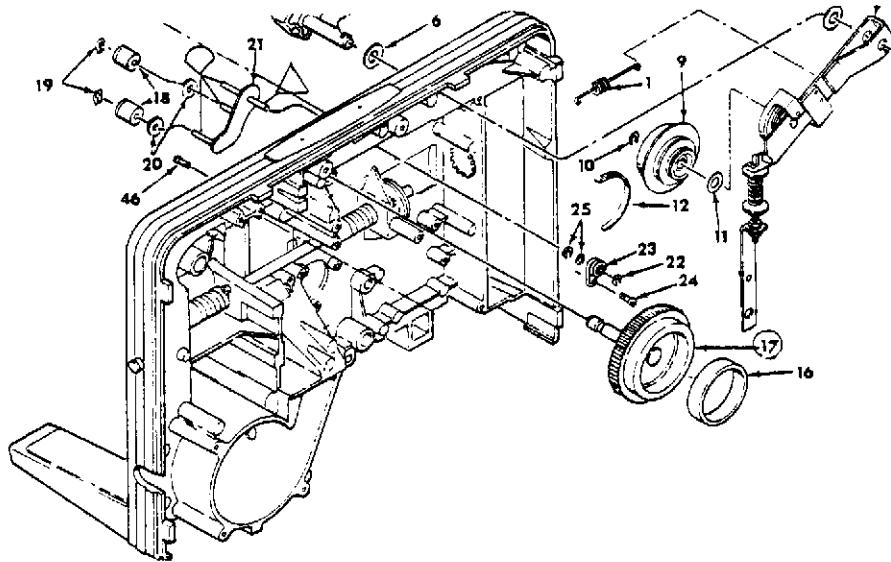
REMOVAL AND REASSEMBLY OF TAKE-UP GEAR
